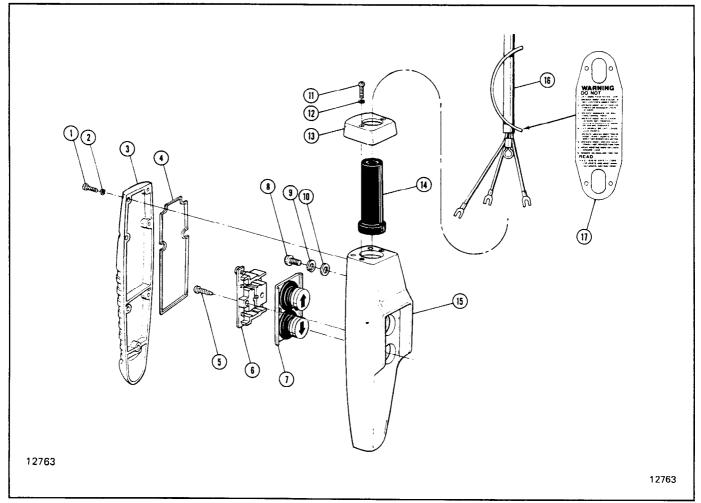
Push Button Station and Conductor Cable Assembly. Single Speed Hoists.
